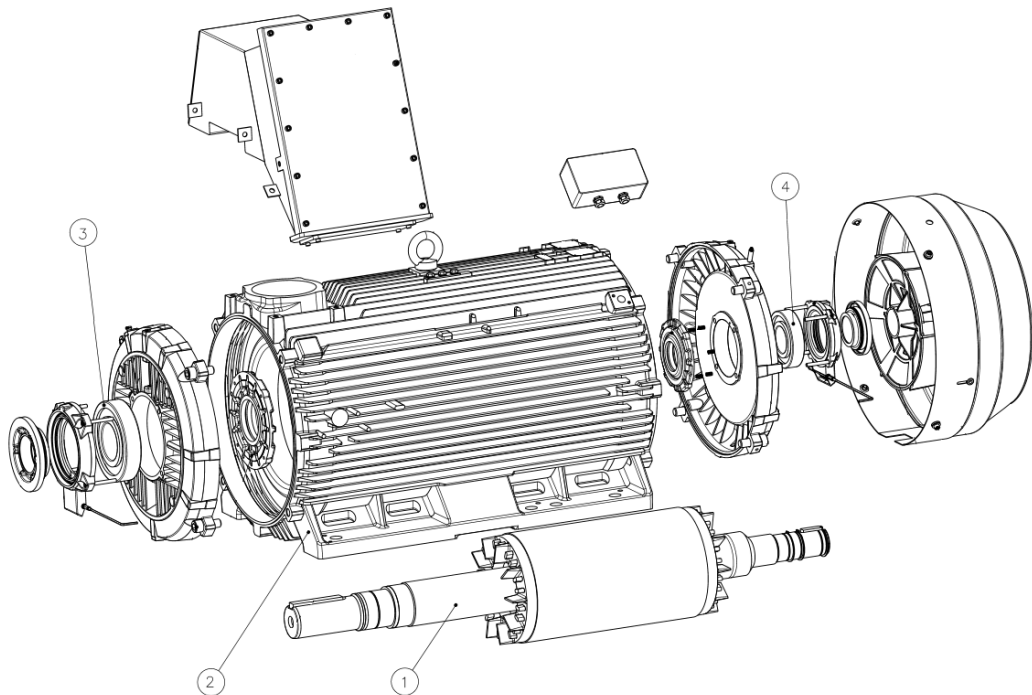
Exploded view of an electric motor. The numbered parts are: 1. Rotor, 2. Stator frame (stator inside), 3. Drive end (D-end) bearing, 4. Non-drive end (N-end) bearing. (Modified from ABB 2011, p. 46)
